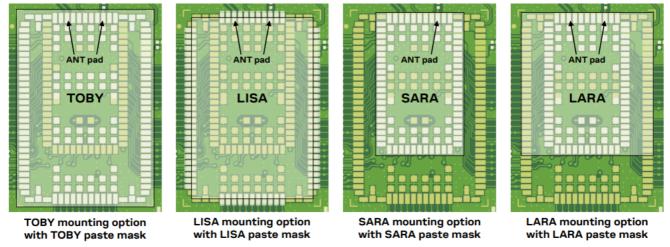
Top-side stencil (paste mask) designs to alternatively mount SARA, LARA, LISA, TOBY modules on the same PCB
